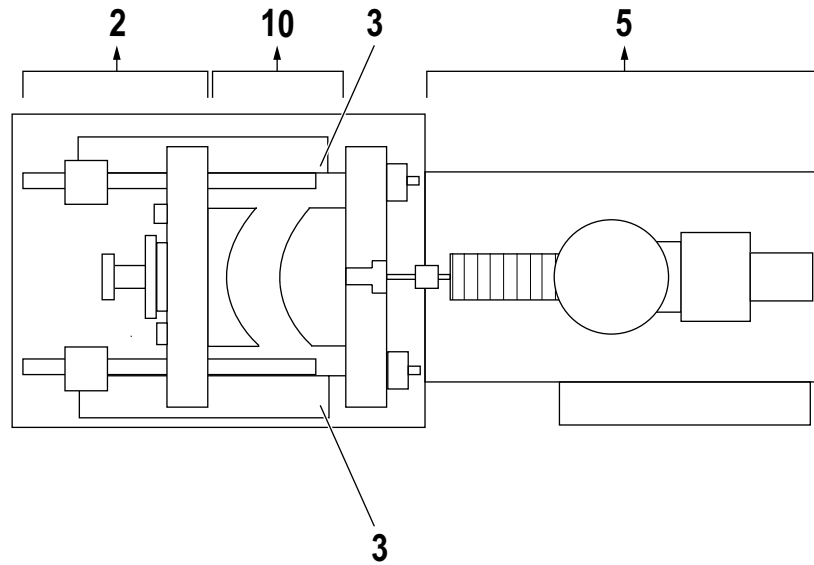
Injection molding machine hazard areas (Top view with guards removed)
